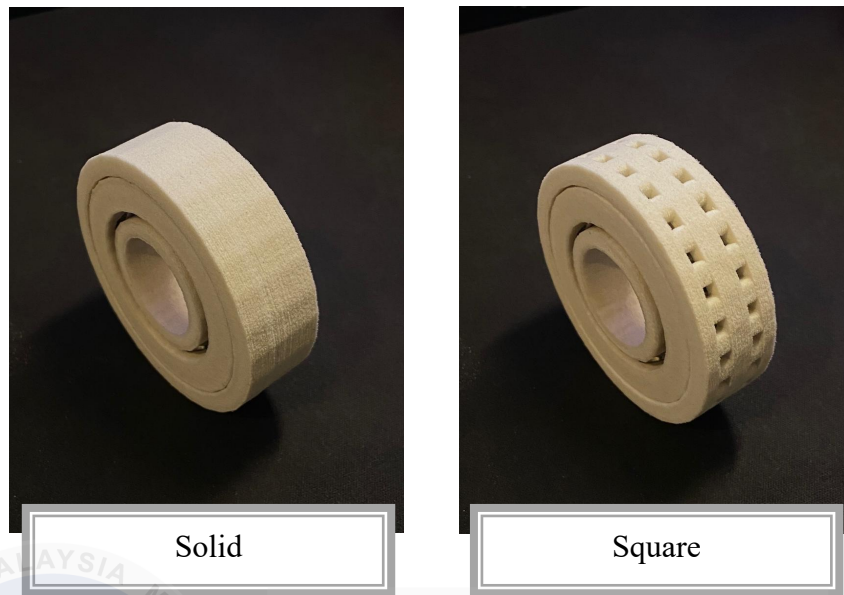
Final Fabricated Hybrid Bearing Geometries
